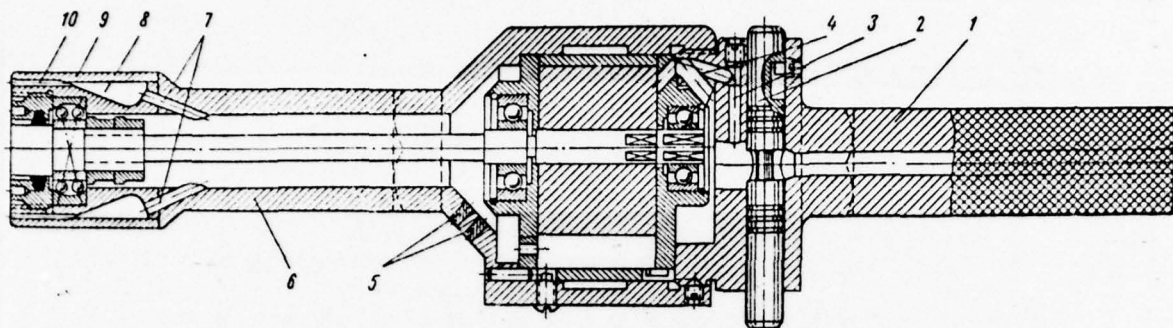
Noiseless pneumatic drill with internal chamber: 1 - rear housing, 2 - valve, 3 - hole, 4 - wall of air chamber (removed), 5 - air holes in old construction of drill (are riveted), 6 - front/leading body, 7 - hole into air chamber, 8 - silencing chamber of noise, 9 - bushing, pressed to lever, 10 - new outlets.
